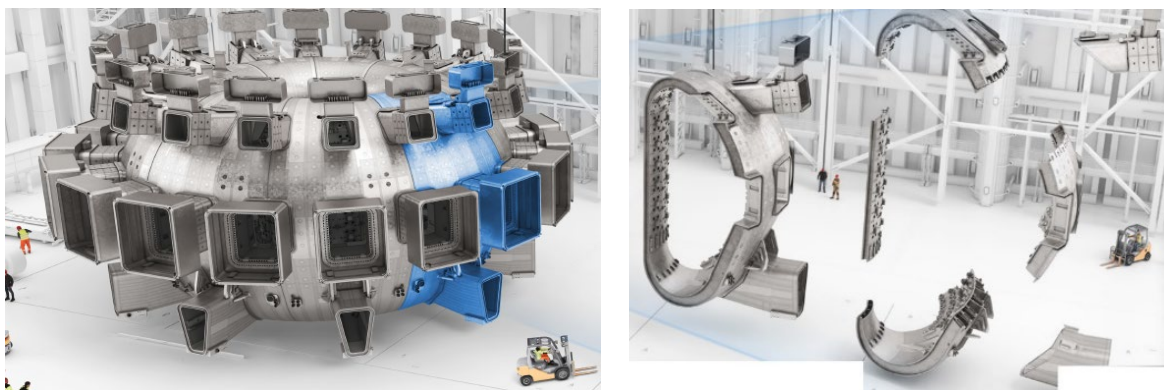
sketch of the assembled torus with 9 sectors – left. Single VV sector and segments and ports exploded view – right.
